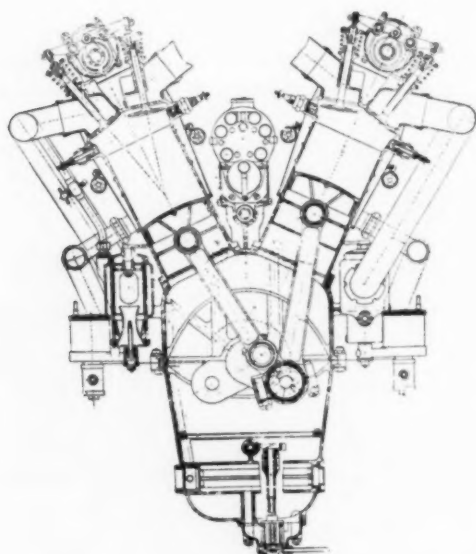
12-CYLINDER WATER-COOLED RENAULT ENGINE. CYLINDERS, 4.9 x 5.9 IN. 200 HP.
